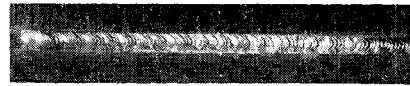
Electron-beam weld on Be-32% Al sheet.
